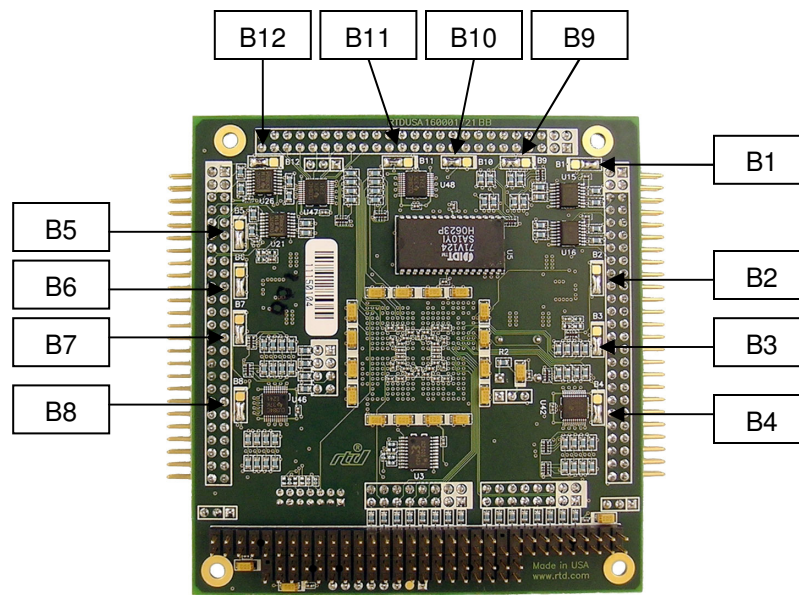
FPGA6800 Board Bottom Solder Blob Locations
